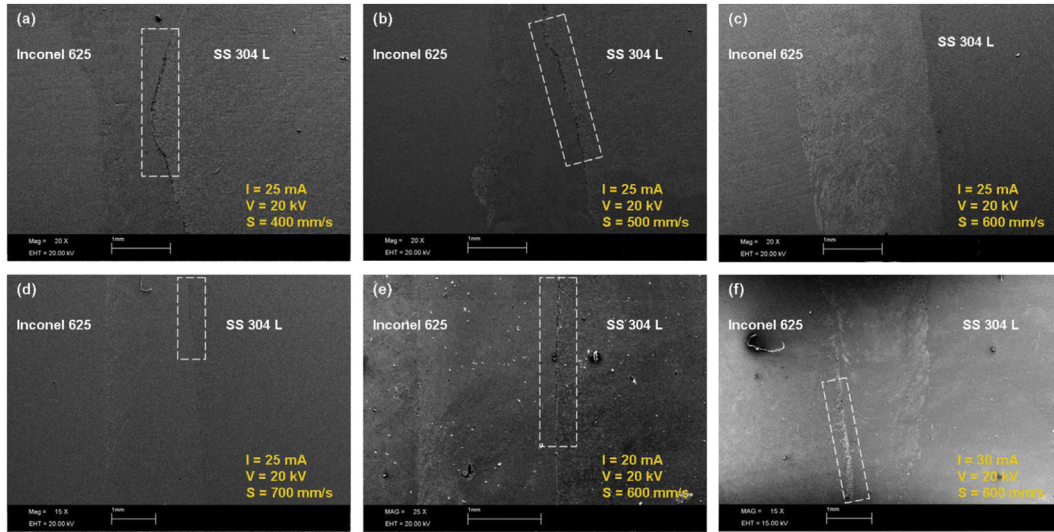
Low magnification SEM micrographs of Inconel 625/SS 304L welds obtained at different welding parameters. The regions marked by rectangles show weld defects.
